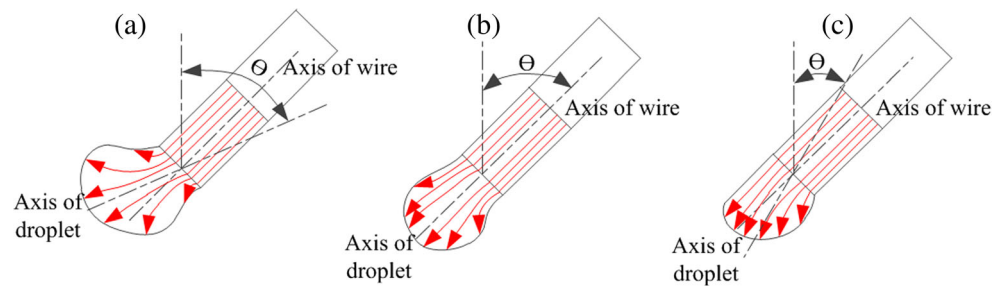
Schematic of forces affecting droplet in hybrid welding
